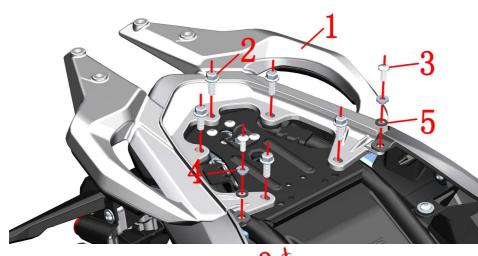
RE	EAR COVER Rear armrest assembly		CHK	(0)
